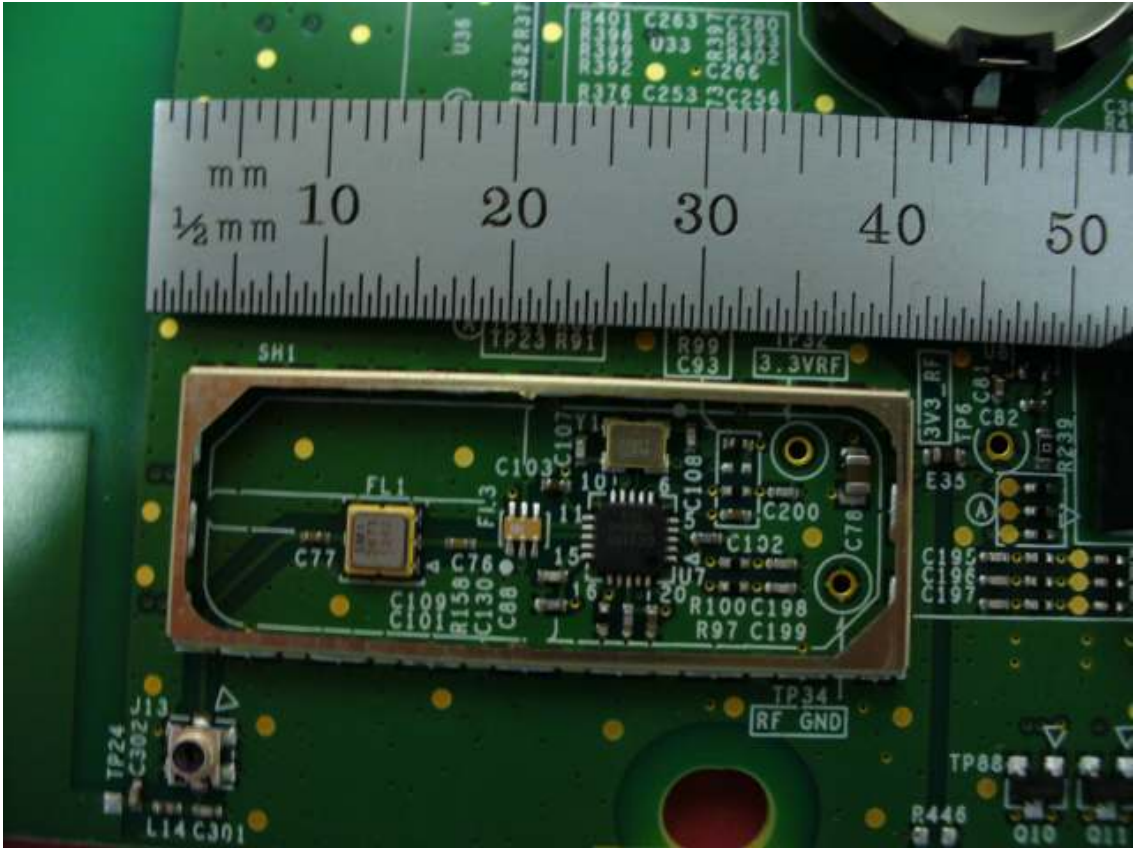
Model 6290 PCB Botom Shield Section (shield cover removed)
